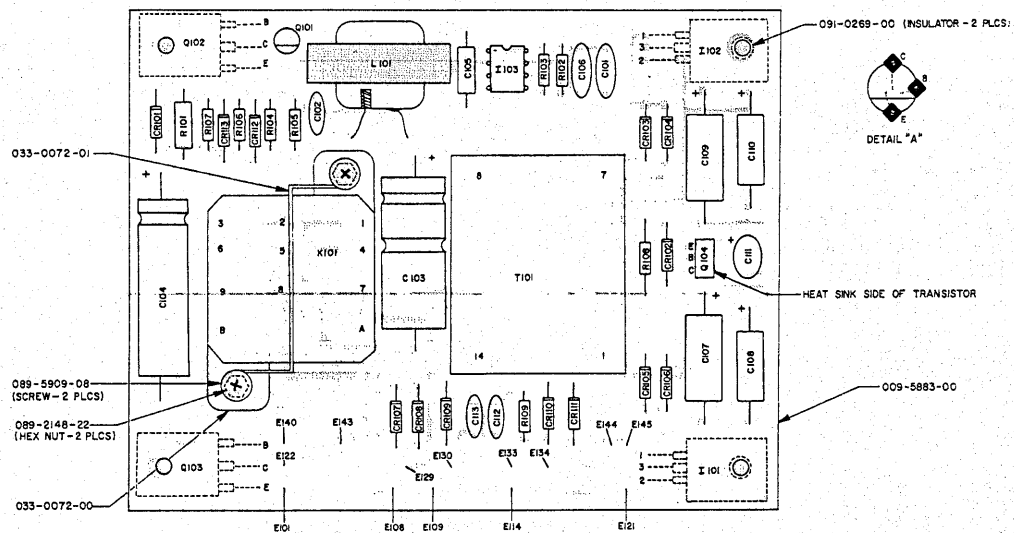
POWER SUPPLY ASSEMBLY (SHT 2)
